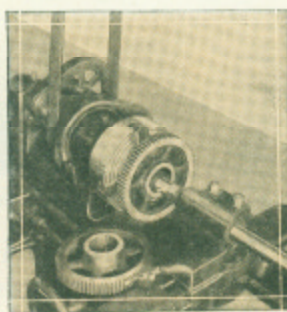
Cutting a Keyway in a Gear on an 18-inch Lathe
